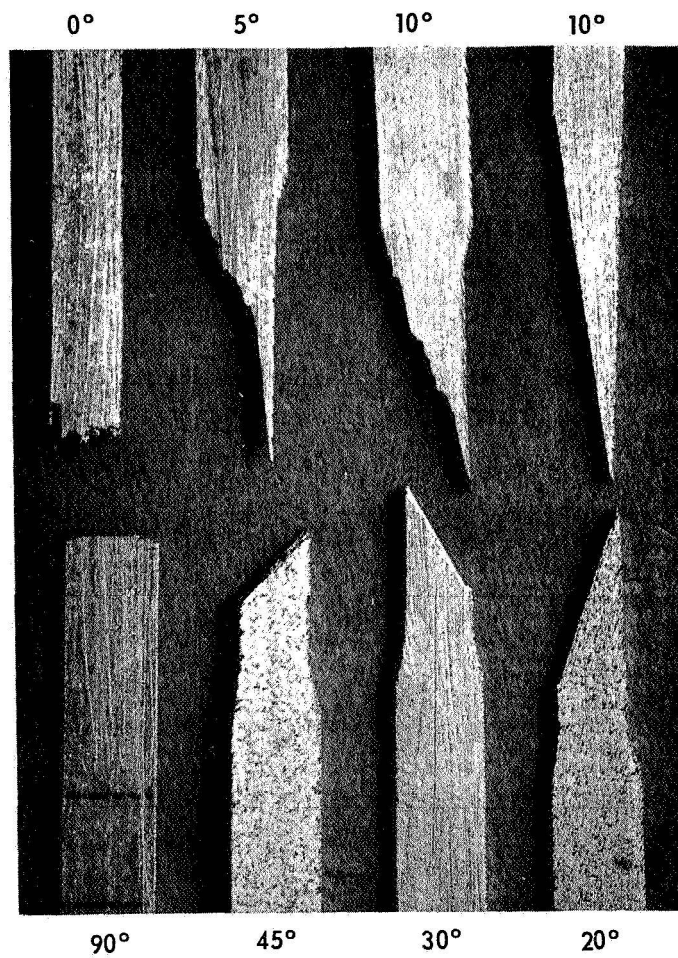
Fractured Surfaces of Borsic-Aluminum Composites. Specimens Were Tested with Given Angle Between Fiber Axis and Tensile Axis
